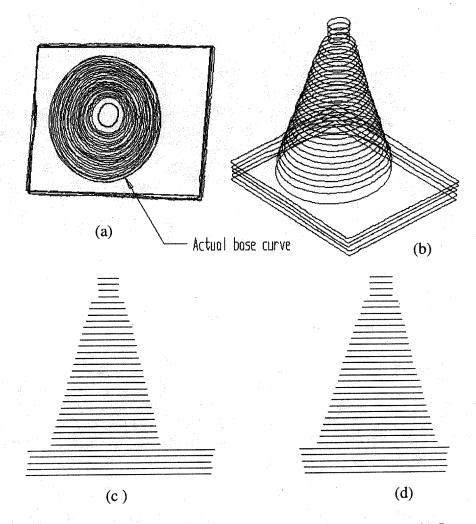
CAD pictures of imported DXF cross sections. (a) Top view, (b) Isometric view, (c) side view and (d) front view.
